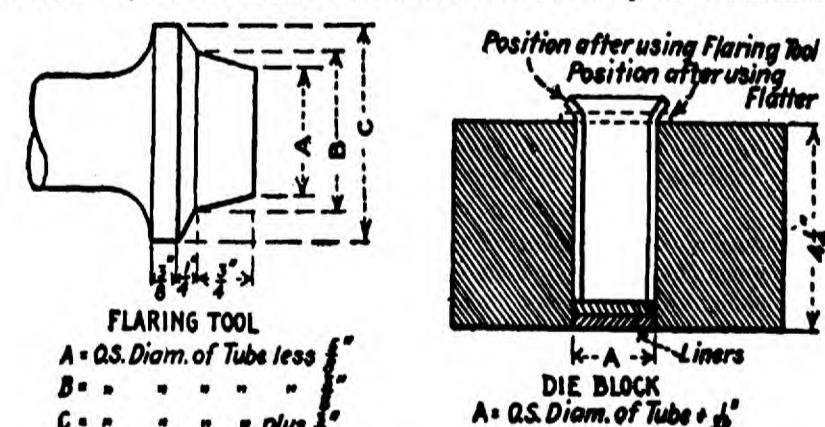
Details of Flaring Tool and Die Block Required for Making Flange Tests of Boiler Tubes.
